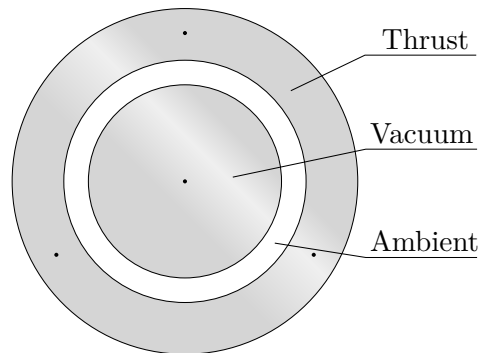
Alternative design for combined thrust and vacuum bearing, with optional ambient pressure in between. Because this design is fully axisymmetric, surface finishing is less complicated.
